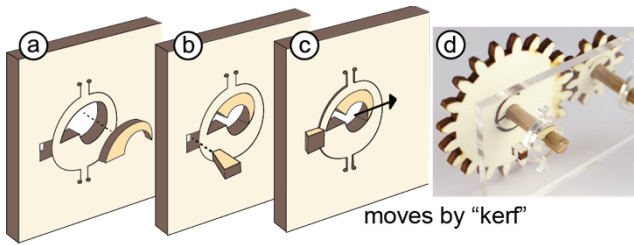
Assembly of the kerf-canceling gear pair. It jams the gears towards each other to compensate for the shorter teeth (a) Insert the bearing wedge, (b) then add a straight wedge next to it, which (c) jams the whole assembly to the right.
